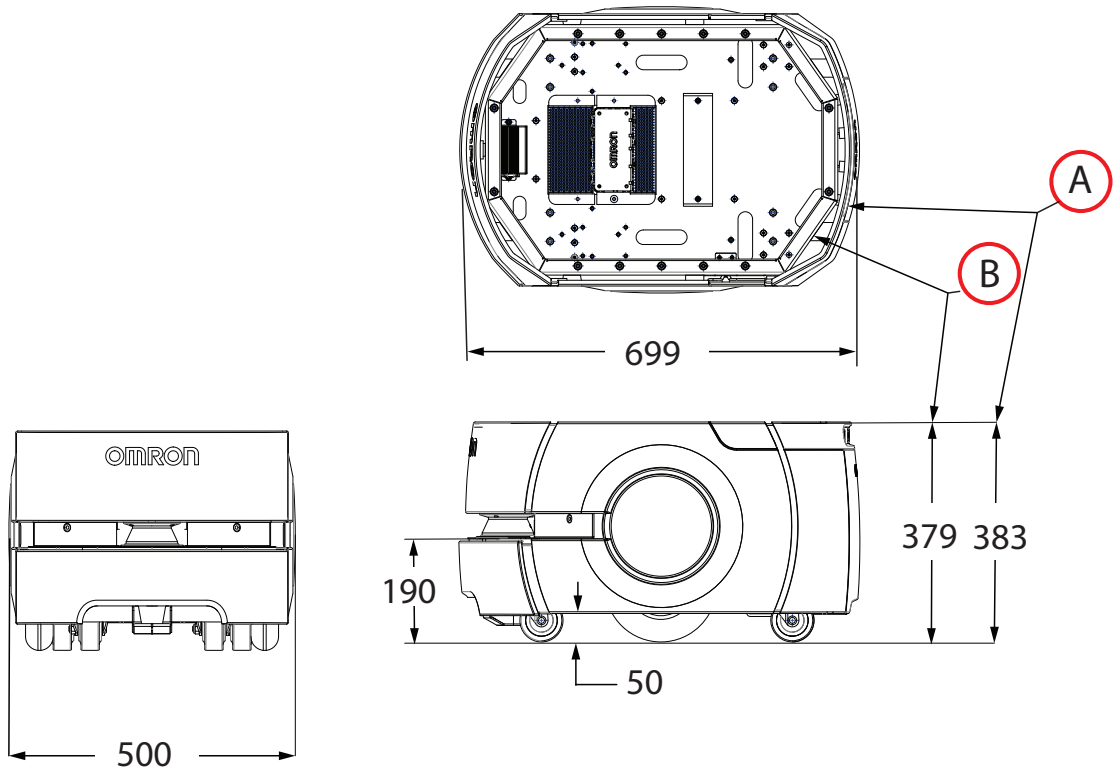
Platform Top, Side, and Front Dimensions Showing, (A) Top of Covers, and (B) Mounting Surface (units are in mm)
